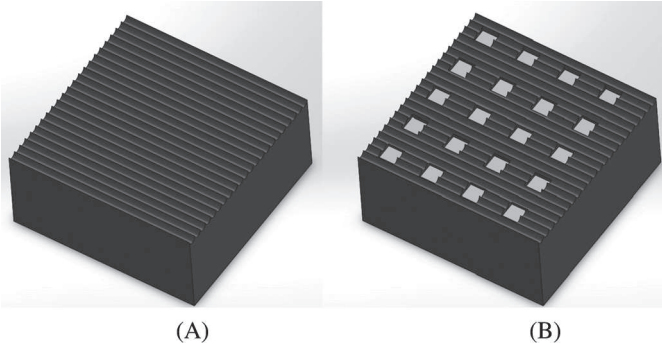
Workpieces used for testing the surface roughness. A- after milling. B- after burnishing.
